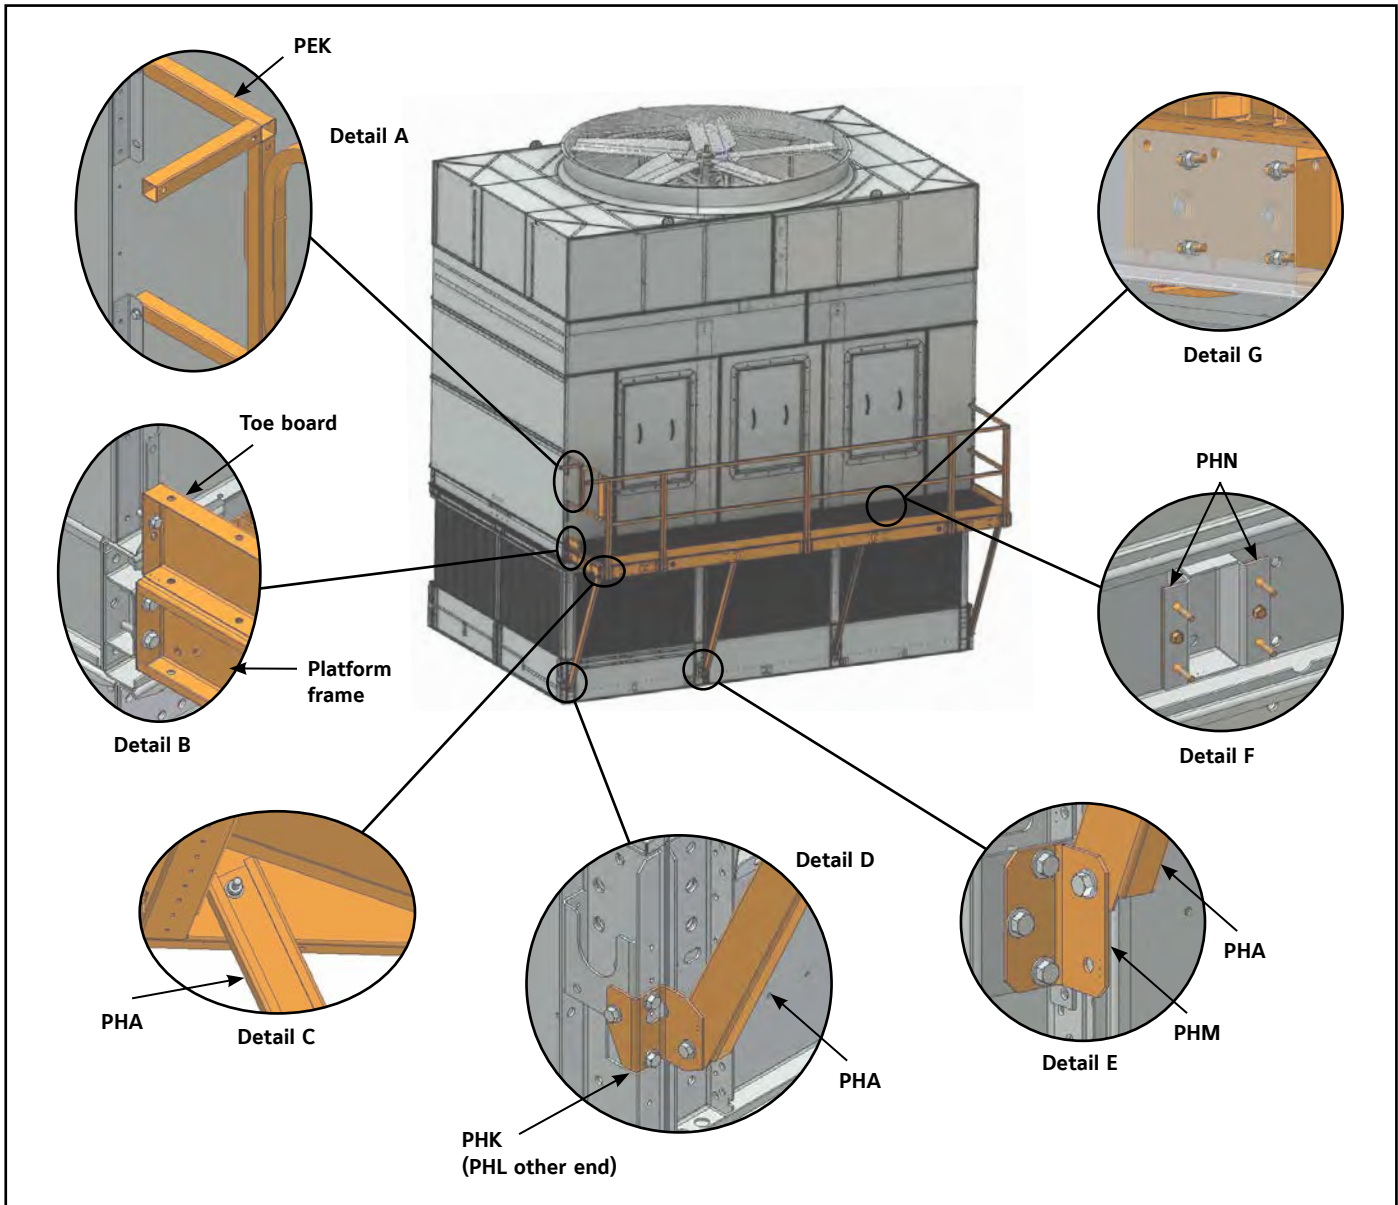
Fill Access Platform with End Ladder - IDCF-0718, 1218, 2418, 1220, 2420
